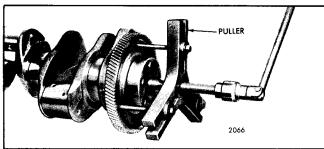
Removing Crankshaft Timing Gear with Puller J 4871
